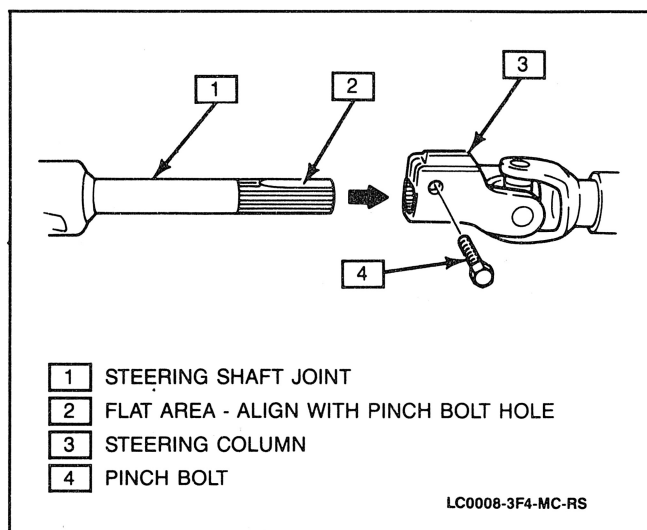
Steering Column-to-Steering Shaft Joint Mounting
